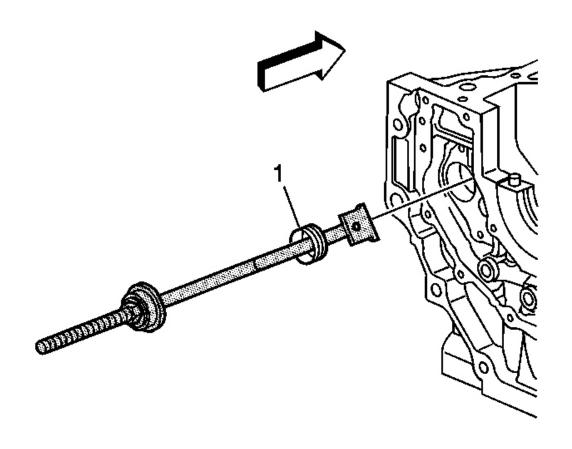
View Of Right Bearing Courtesy of GENERAL MOTORS CORP.
